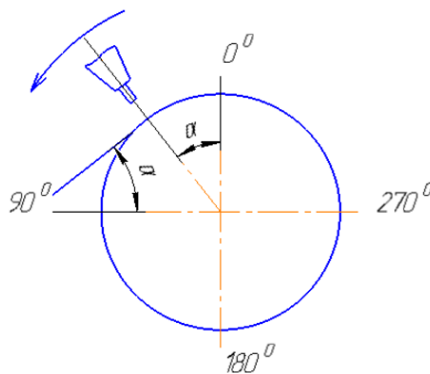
The position of the welding bath during the orbital welding of the non-rotating joint counterclockwise
